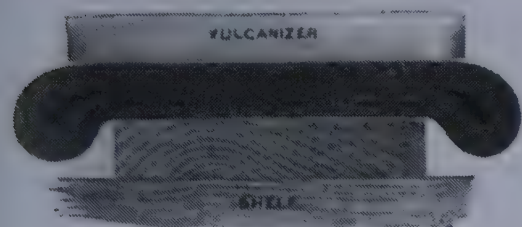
Cross Section of Vulcanizer, Splicing a Tube
